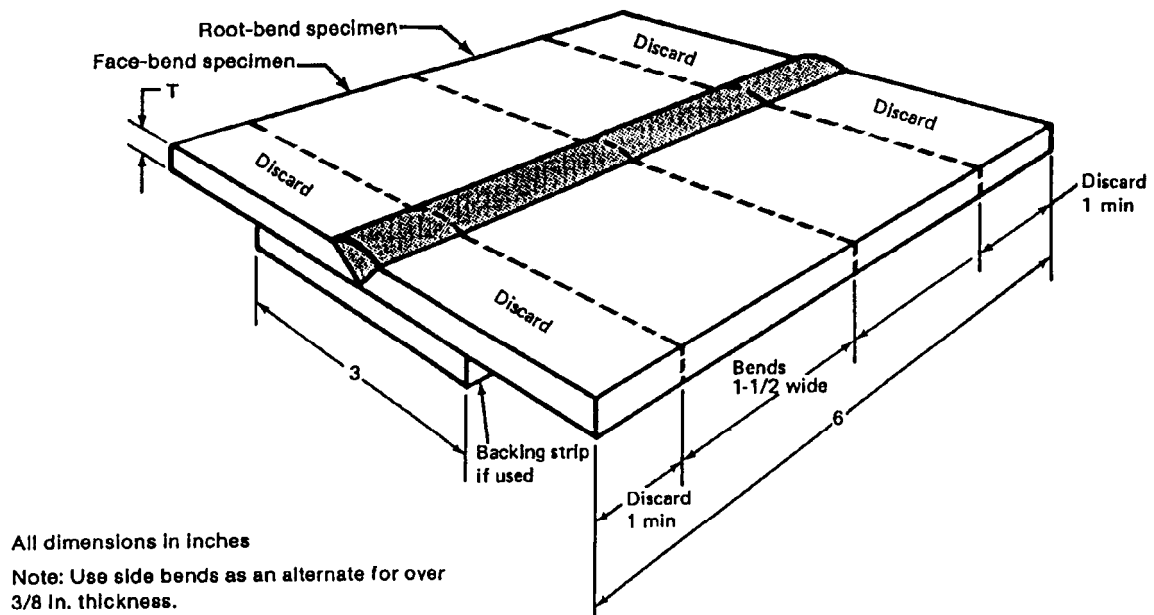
Standard Plate Transverse Bend Test Weldments
